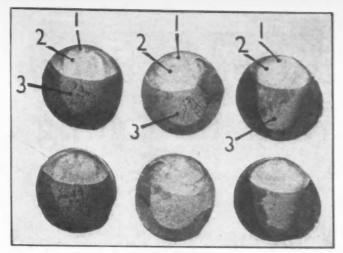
Bending fatigue failure starts from small interior inclusions:
